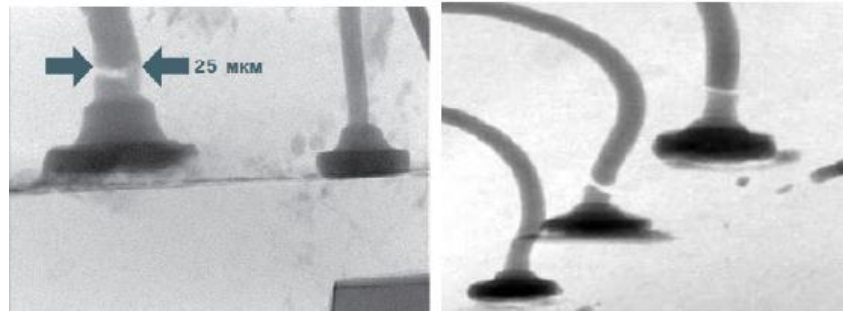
Cracks in the ball joint of the gold welding wire
